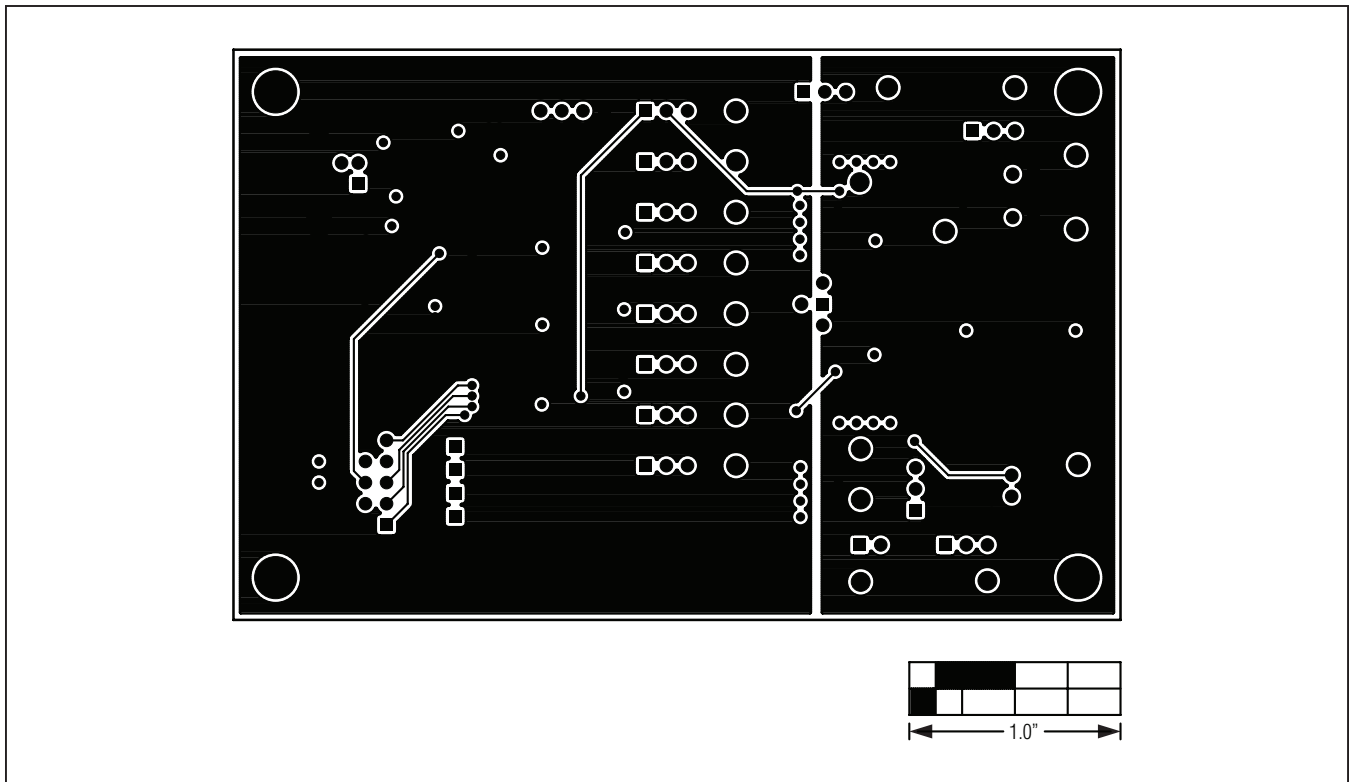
MAX544X EV Kit PCB Layout—Solder Side
